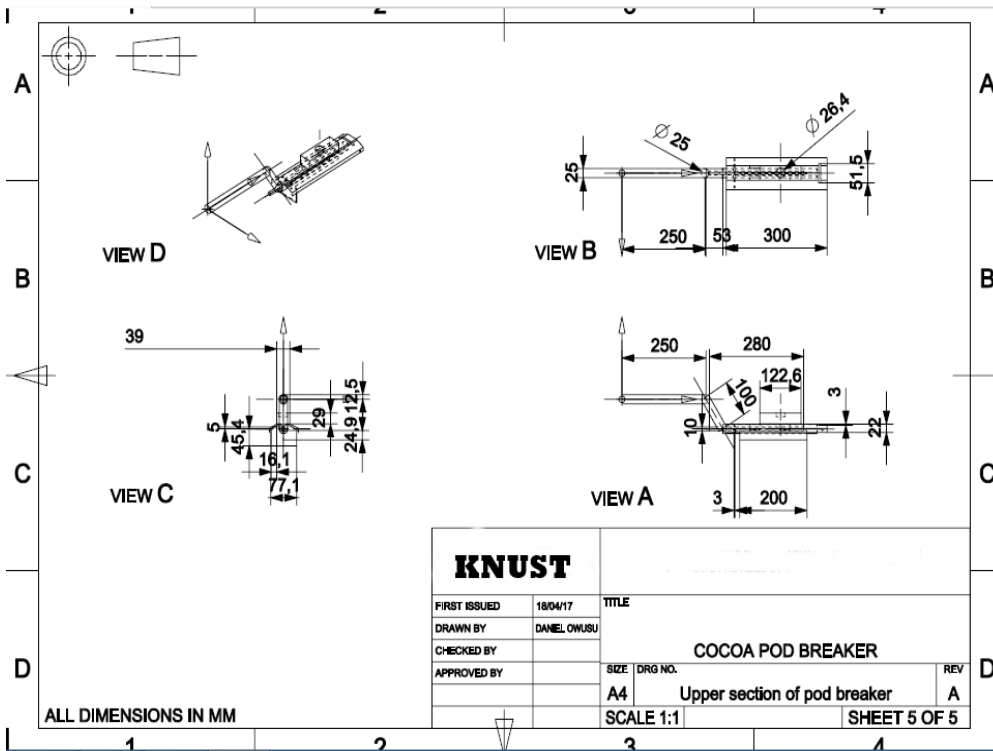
Upper section of the cocoa pod splitter (Engineering drawing)
